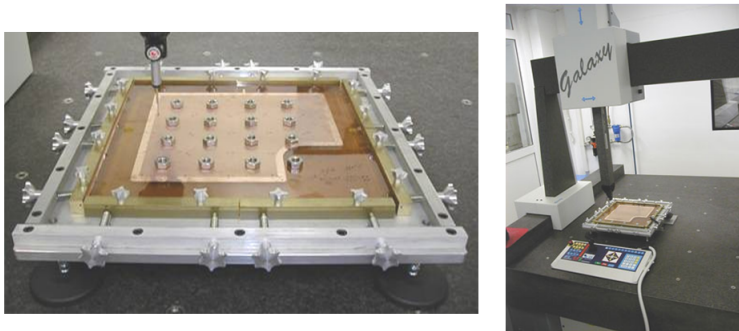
Left: Close view of the distributed load on the GEM foil; Right: The 3-D machine used for the measure GEM sag.
